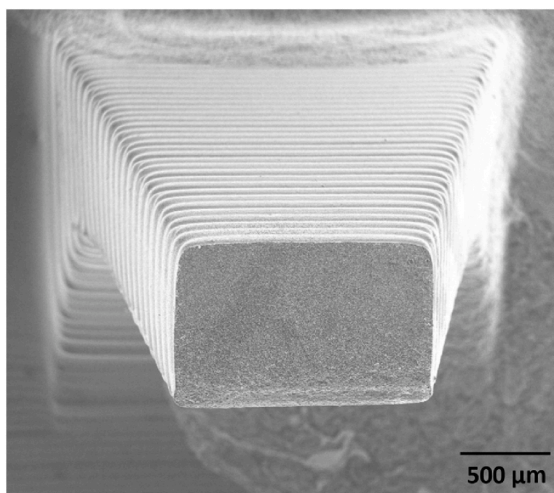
Fracture surface of a sintered cantilever of specimen type B1. Note that the observed cross-section deviates significantly from the assumed rectangular cross-section.
